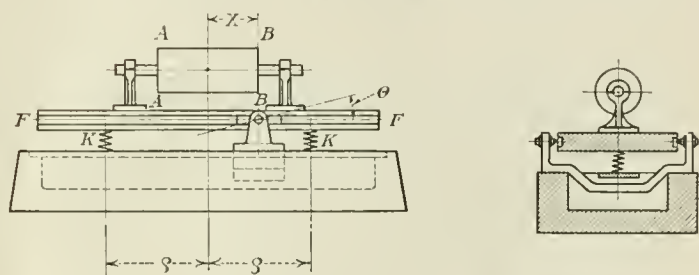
SCHEMATIC ARRANGEMENT OF BALANCING MACHINE
